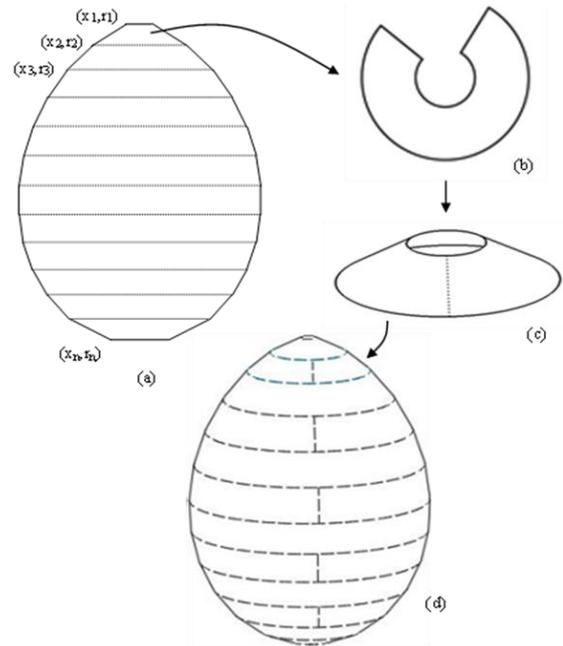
Fabrication process of single layer egg-shaped shell structure made of thin steel plate.
